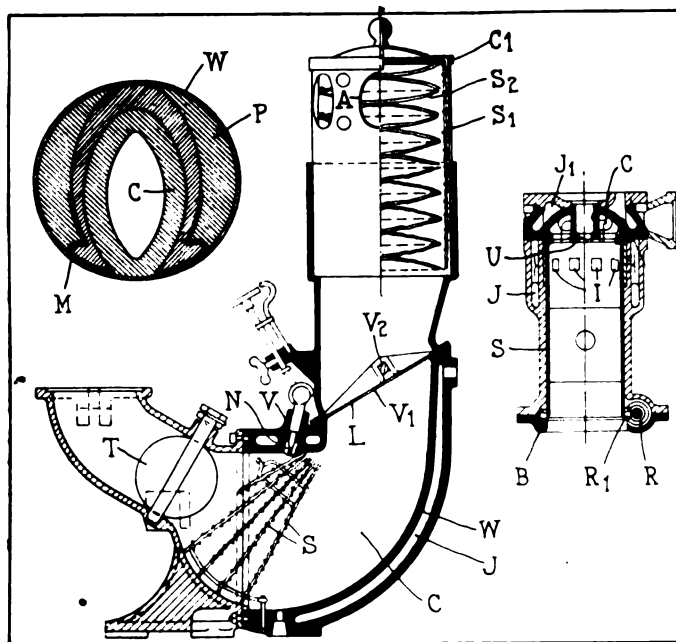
Margetts tire-making mold. Fig. 2—Thompson screen carbureter. Fig. 3—Gerhardt sleeve-valve motor
